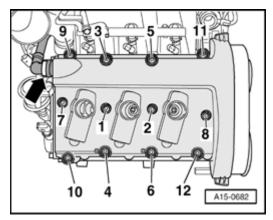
Removing/Installing Hose Of Crankshaft Housing Ventilation & Unscrewing/Screwing Bolts
